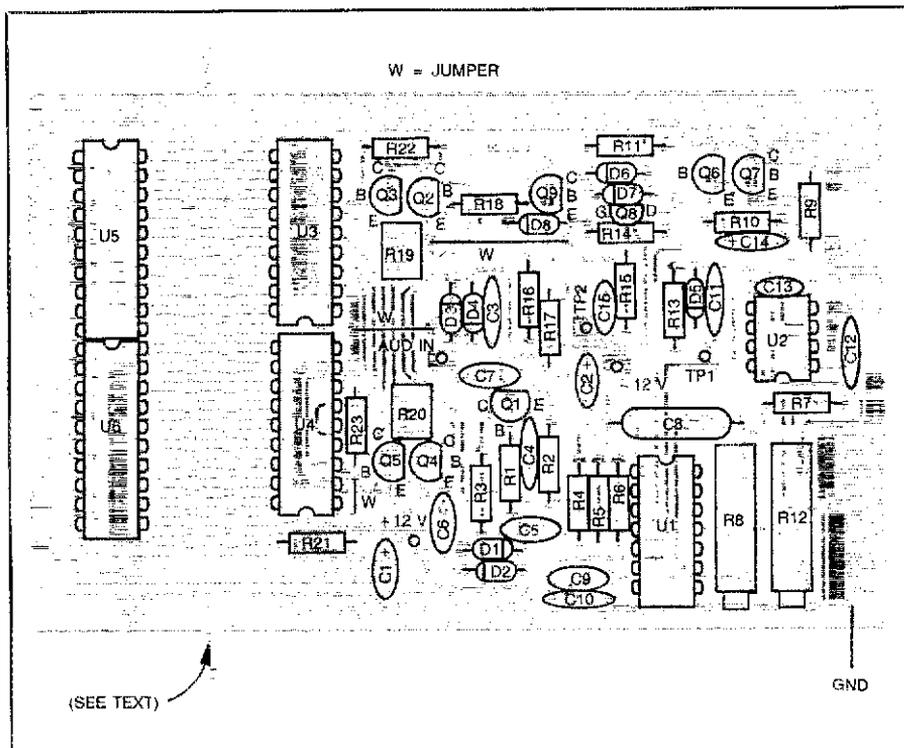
Parts-placement guide for the tuning indicator. Parts are placed on the nonfoil side of the board; the shaded area represents an X-ray view of the copper pattern. Note the jumpers (W) required; these should be installed first. The arrow points to the junction at which the board may be separated (see text).
